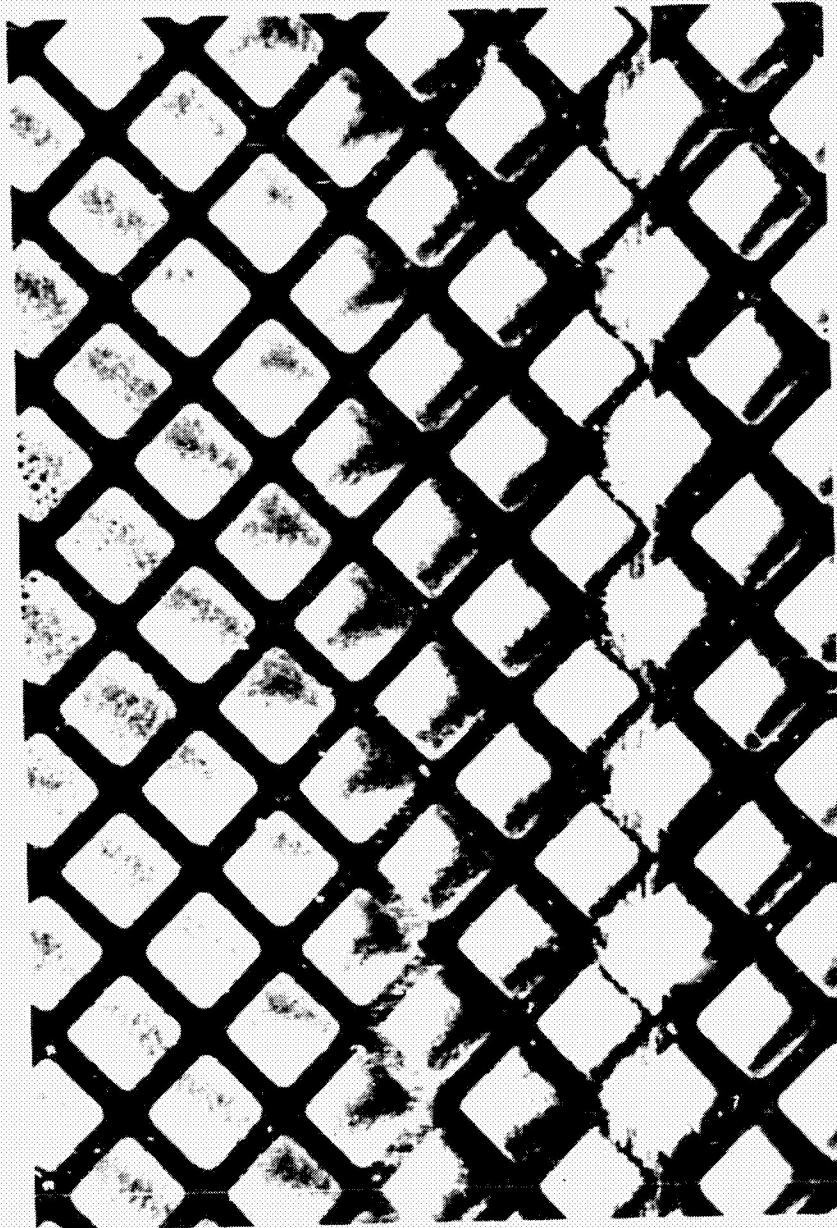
Close-up of Welded Back of Ultrathin Cell.
